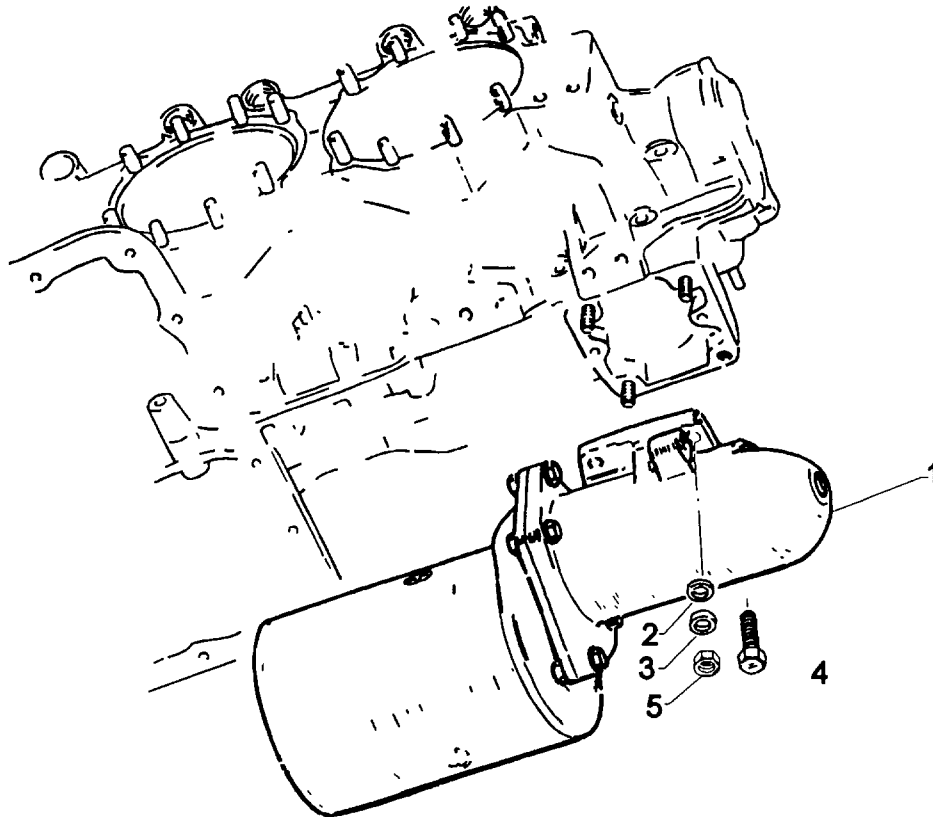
STARTER MOTOR AND ATTACHING PARTS
